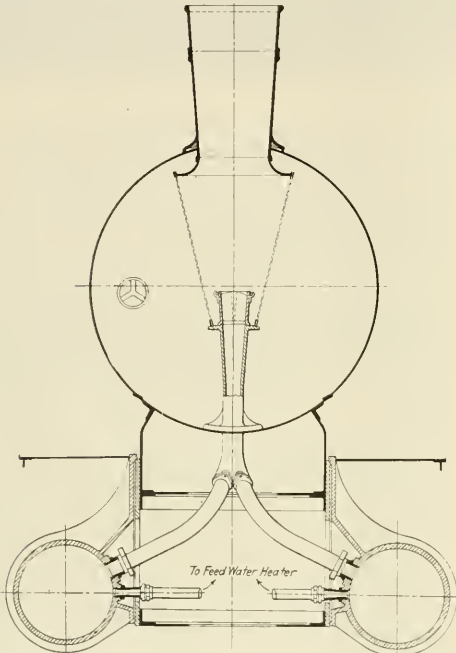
Arrangement of Exhaust Passages and Nozzle
